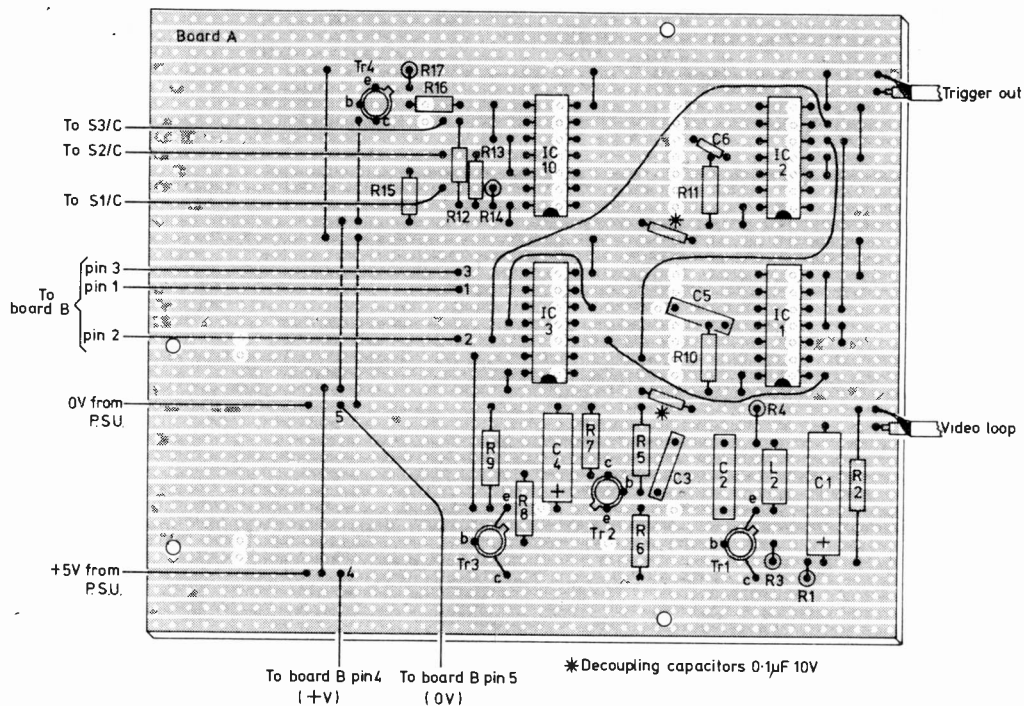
(a): Component layout and Veroboard cutting details for Board A, carrying the sync separator and output circuitry.
